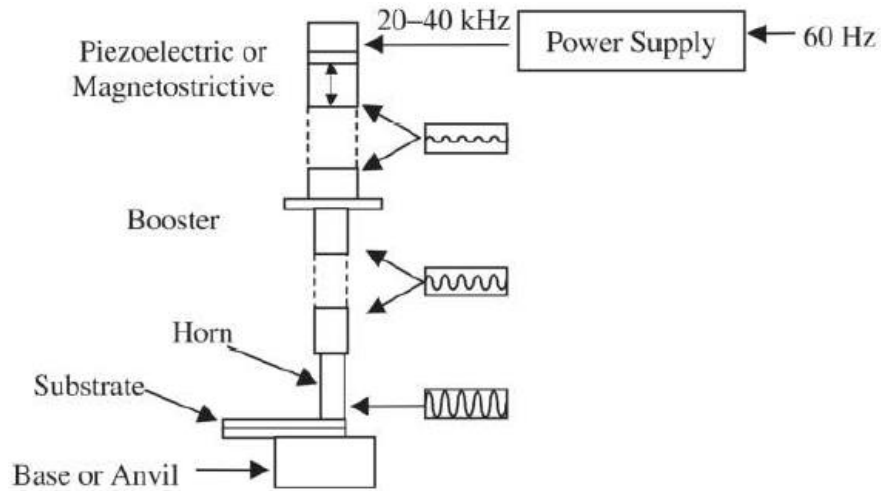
Components of a common ultrasonic welder [25].
